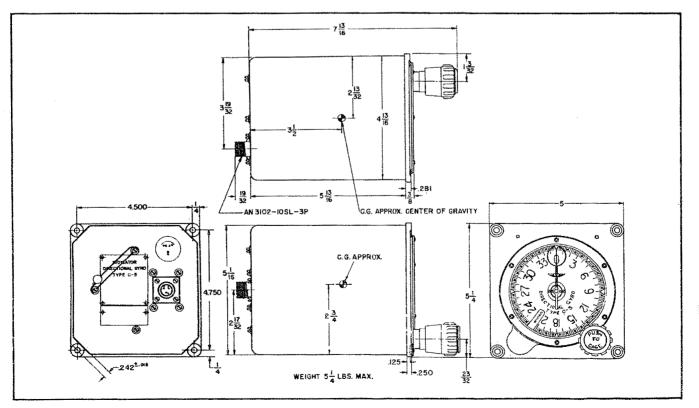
B - Outline Drawing (AF Type C-5 Indicator, Sperry Part No. 652191)
